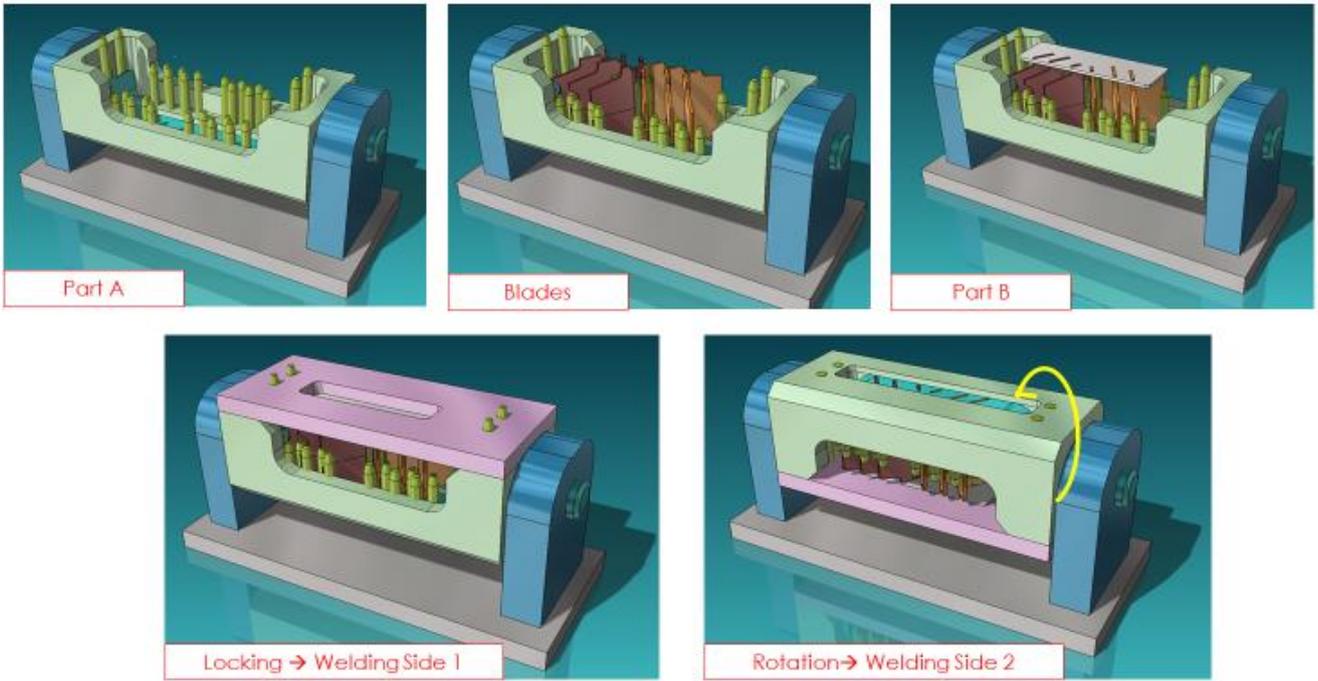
Stage 2 welding mask, revision 01 [7]
